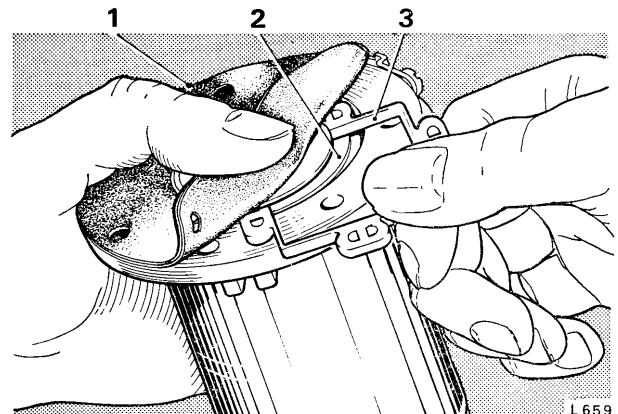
FITTING THE NYLON ARMATURE GUIDE PLATE
